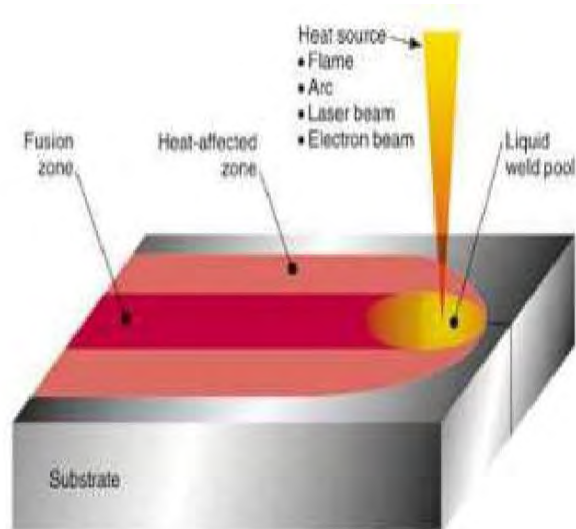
Welding process (Singh *et al.*, 2014)
